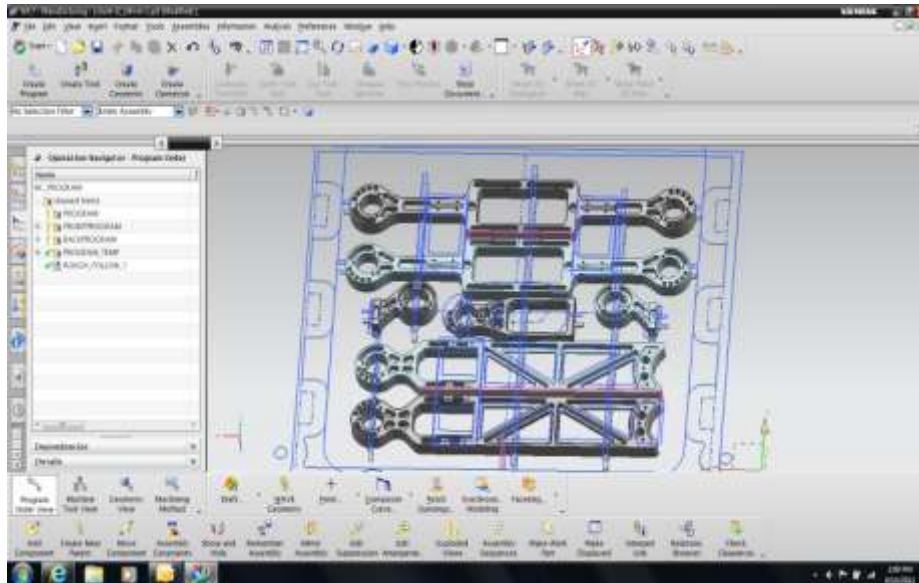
Making a tool path using NX7-Manufacturing (Top)
